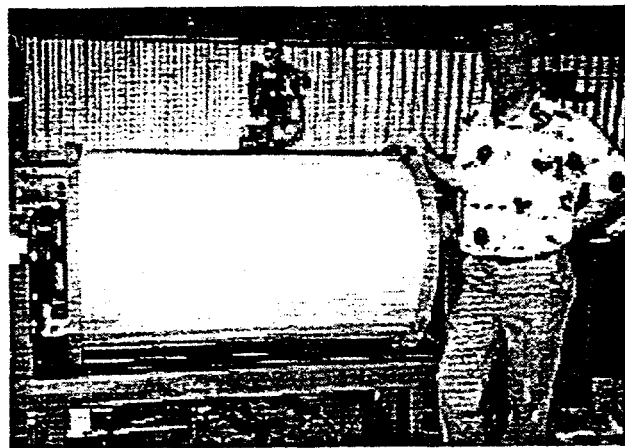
Former for first of the 1MVA transformer coils mounted on the winder at winding start.
